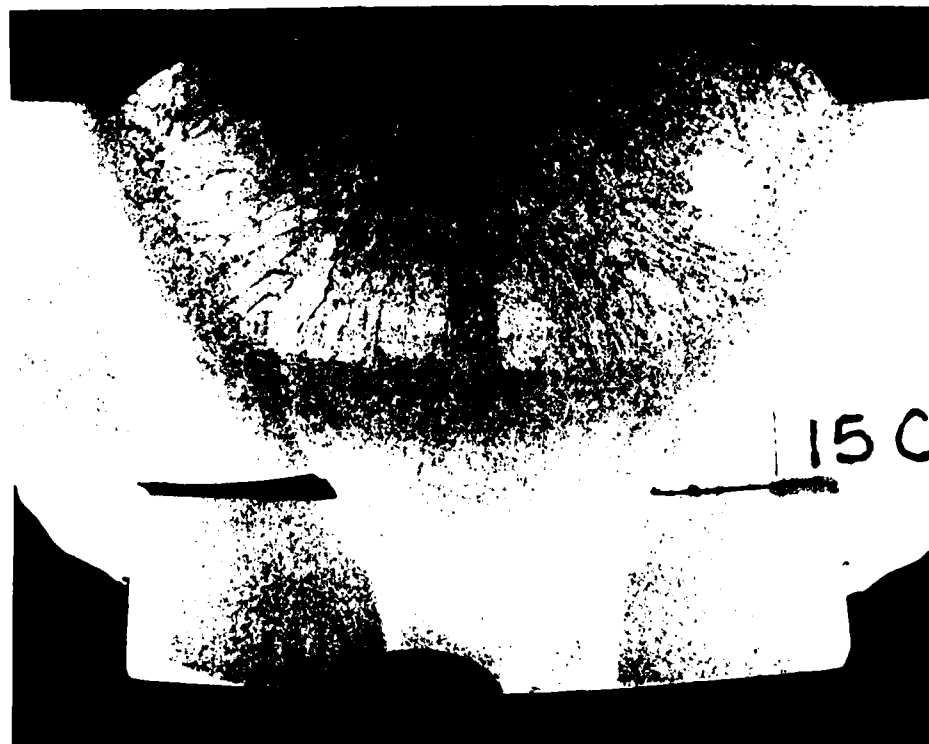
Photomacrograph of weld number 15 after making correction in centering.
